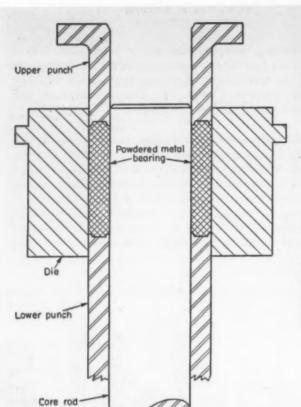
Above—Simple, easily manufactured powder-metal bearings
